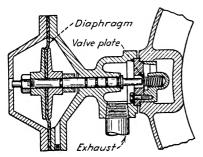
High-pressure-cylinder relief valve for compressor in Fig. 137.
